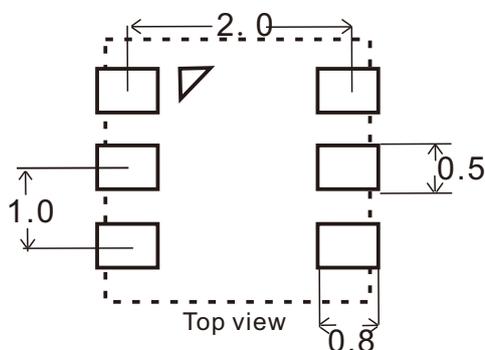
Recommended sensor PCB design size (unit: mm), the outer dotted line is the external size of the SMD package.
